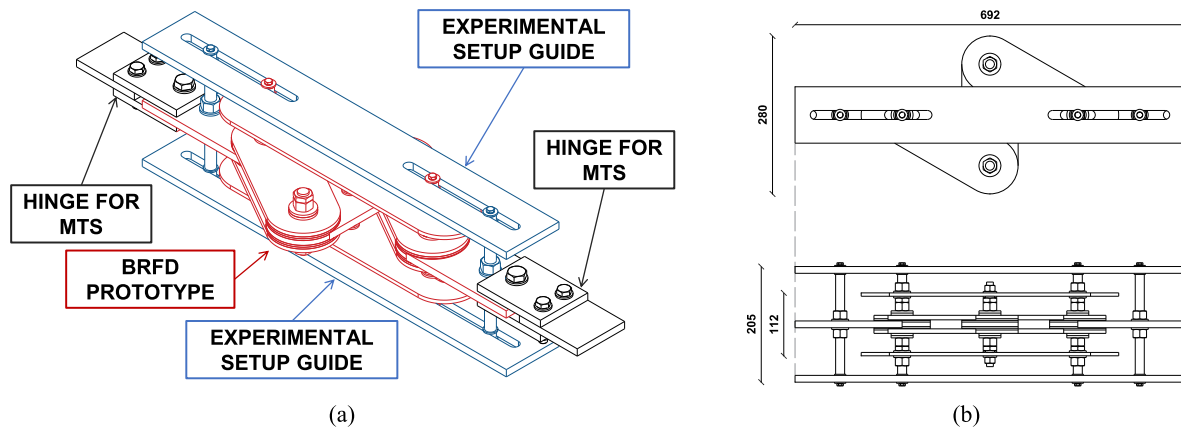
BRFD prototype drawings: a) axonometric view with details and b) top and side view. Dimensions in mm.
